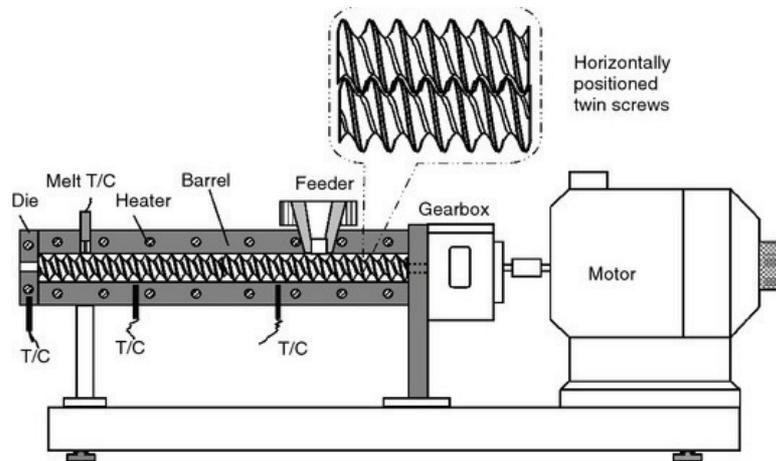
An assembly of twin screws and their arrangement in the extruder.
